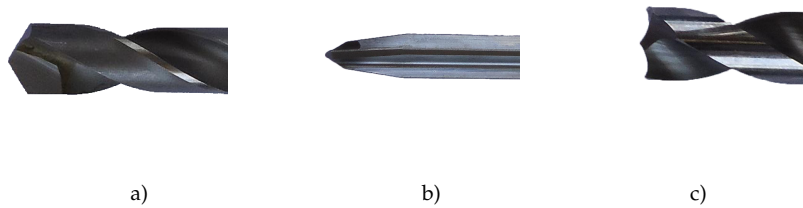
Tool geometries used on the experimental work: a) Twist drill; b) Straight flute drill; c) W-shaped drill.
